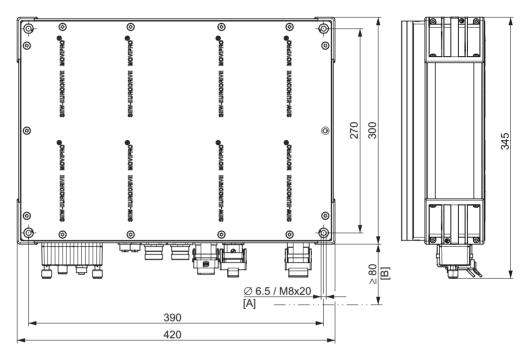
Dimension drawing for PHC11A, dimensions in mm
